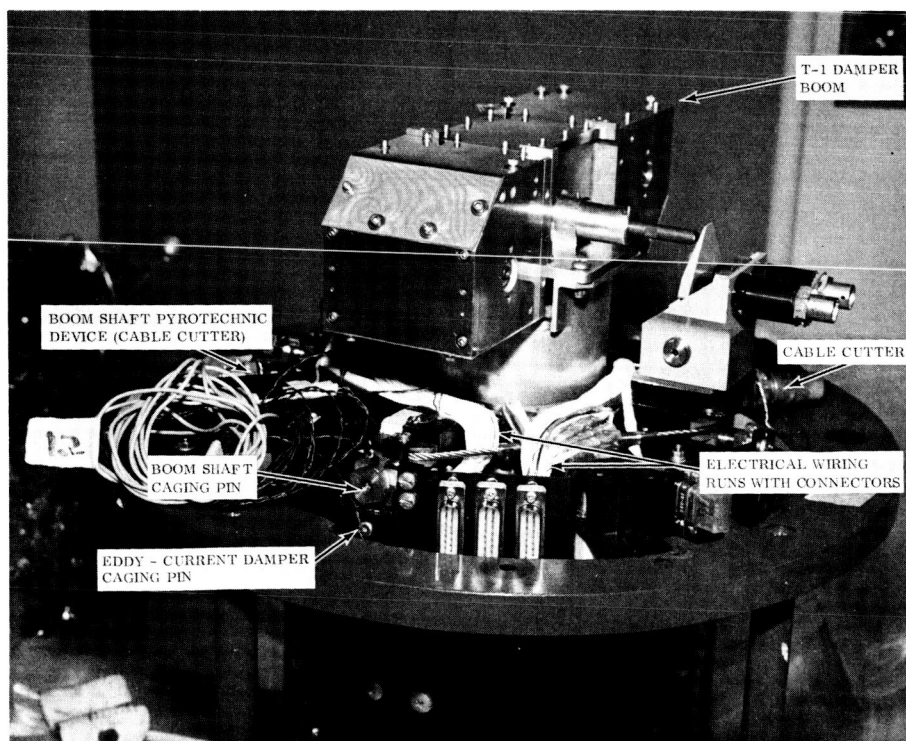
Baseplate General Arrangement, CPD Engineering Unit 1
